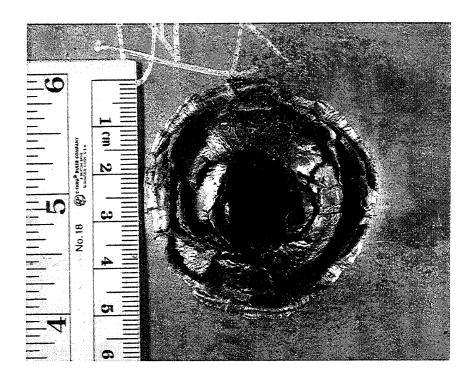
Photograph of typical exit spall in STA Ti-6Al-4V.
